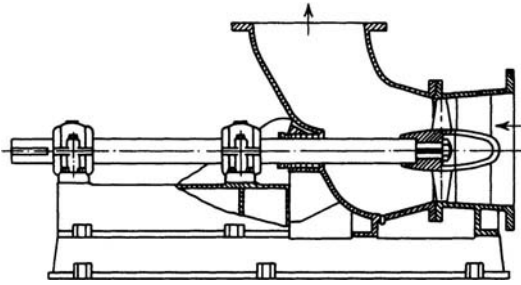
Axial-flow elbow-type propeller pump. (Courtesy of Lawrence Pumps, Inc.)
